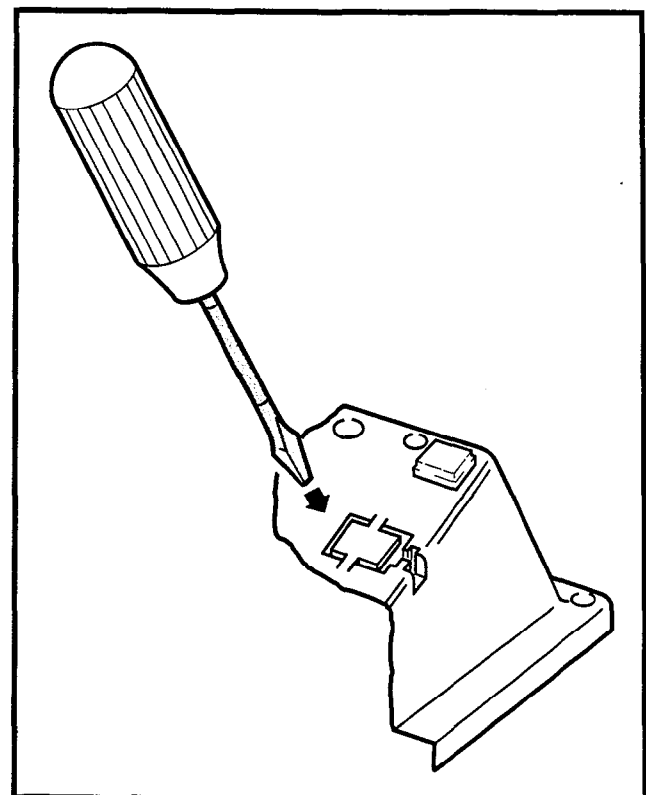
REMOVAL OF HHEU MODULAR CONNECTOR ACCESS TAB
